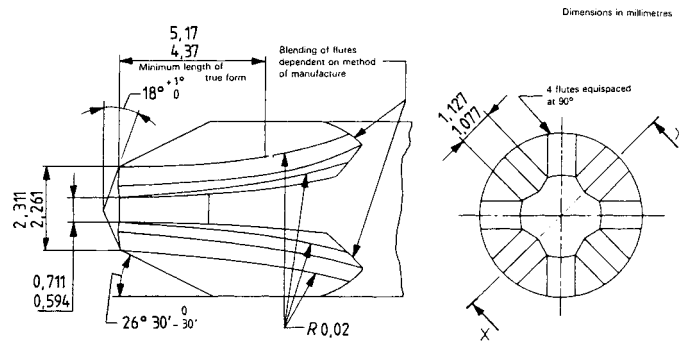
Dimensions and Tolerances of Cross-Slot (Modified Phillips) Screwdriver Bit
